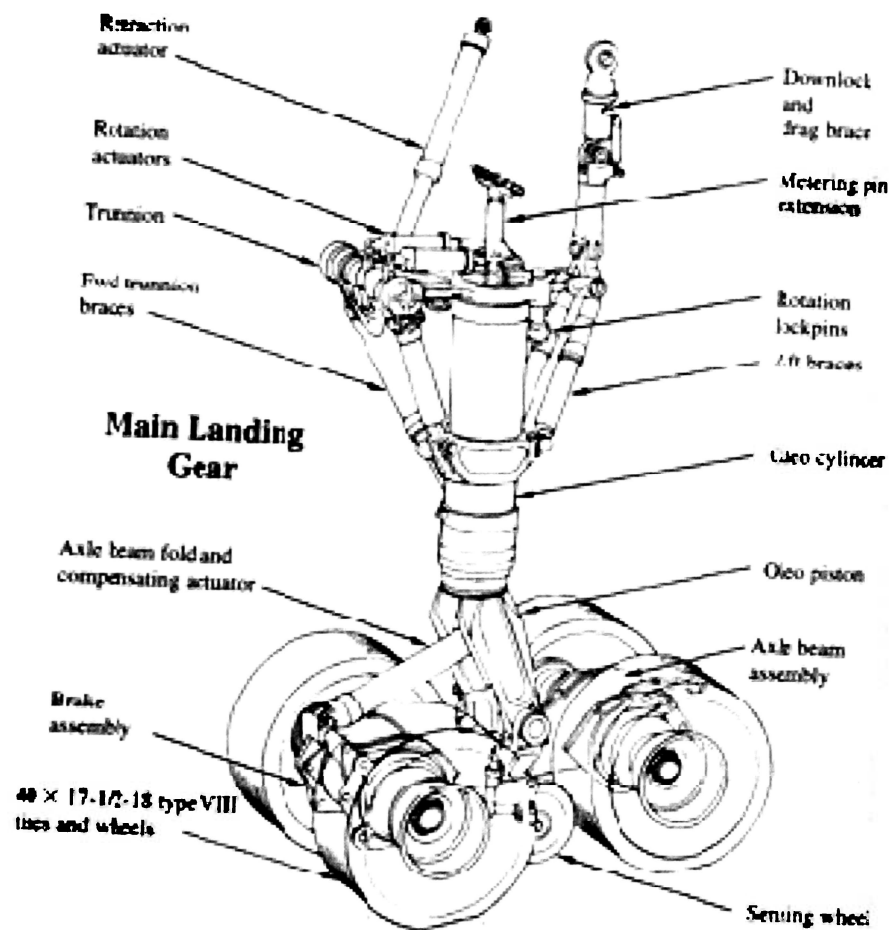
Multi-Wheel Landing Gear Arrangement³⁶.
